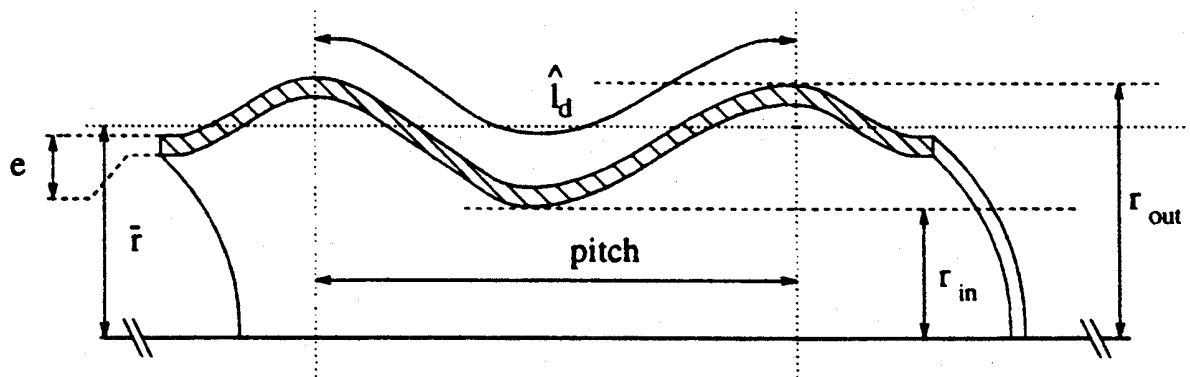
Schematic view of a section of the 1.9 K heat exchanger tube.
